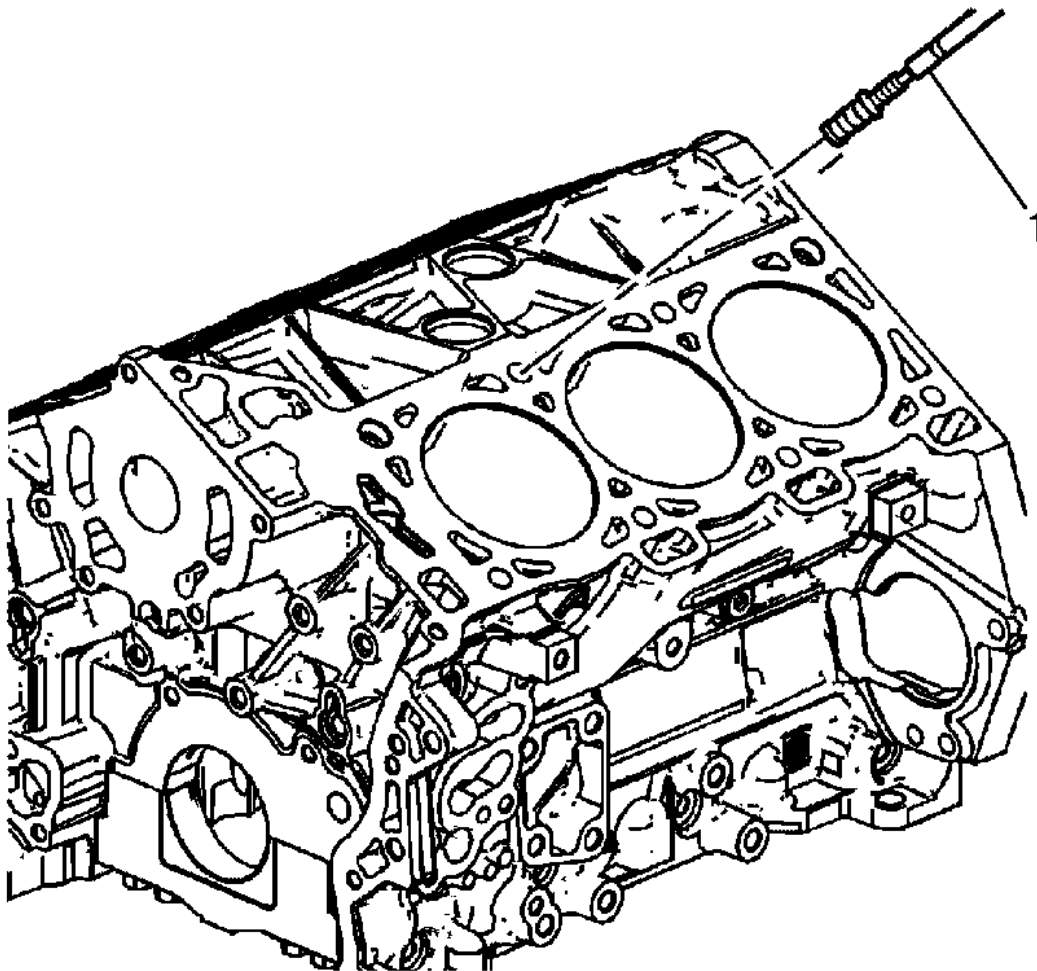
Identifying Insert & Driver Installation Tool
